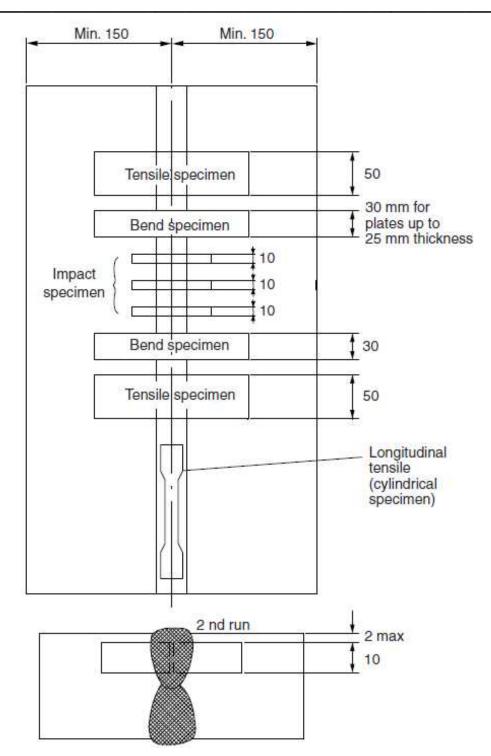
Butt weld test assembly for two-run technique (All the dimensions are in mm.)
